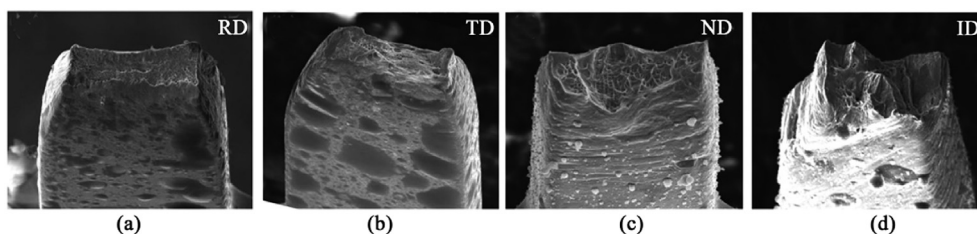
Overall fracture morphologies of the micro-specimens tested in (a) RD, (b) TD, (c) ND, and (d) ID.
